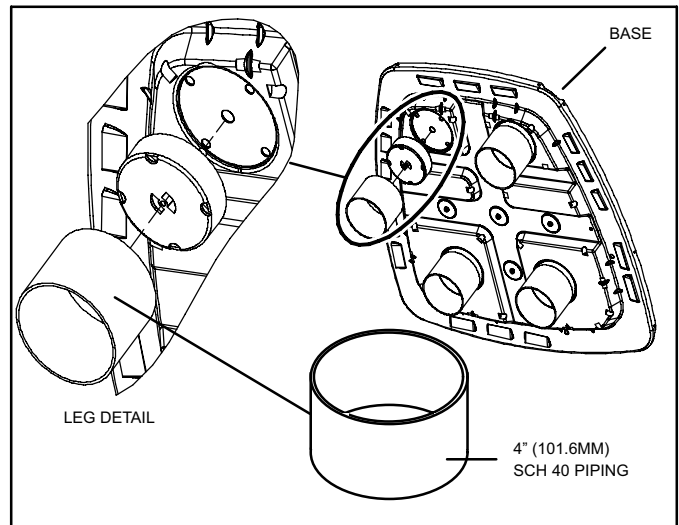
Elevated Slab Mounting using Feet Extenders (Small Base Units)
